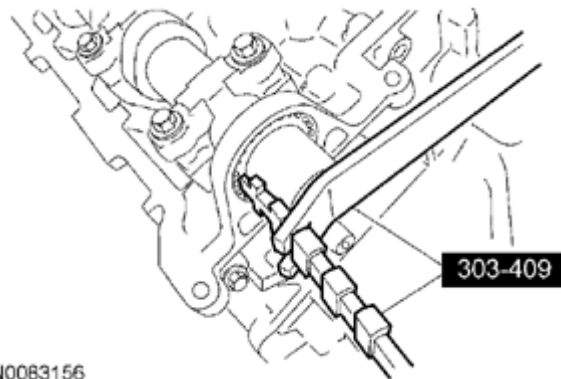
Removing Camshaft Oil Seal Using Oil Seal Remover
